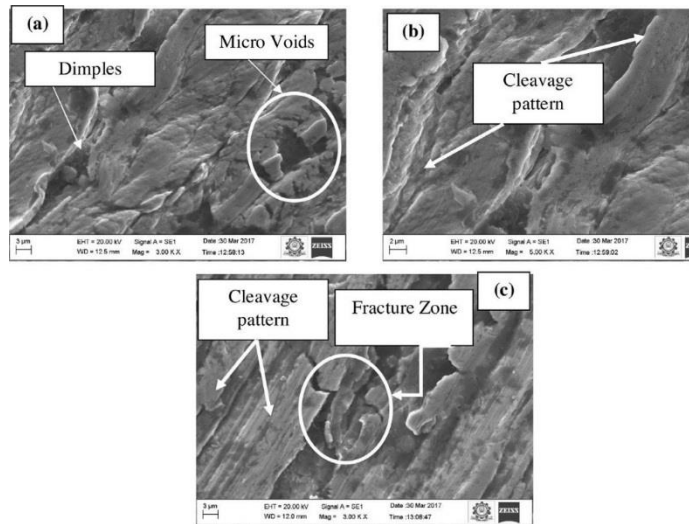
SEM micrograph of the fracture zone (a) SS316L similar joints (b) Inconel 625 similar joints (c) SS316L and Inconel 625 dissimilar joints.
